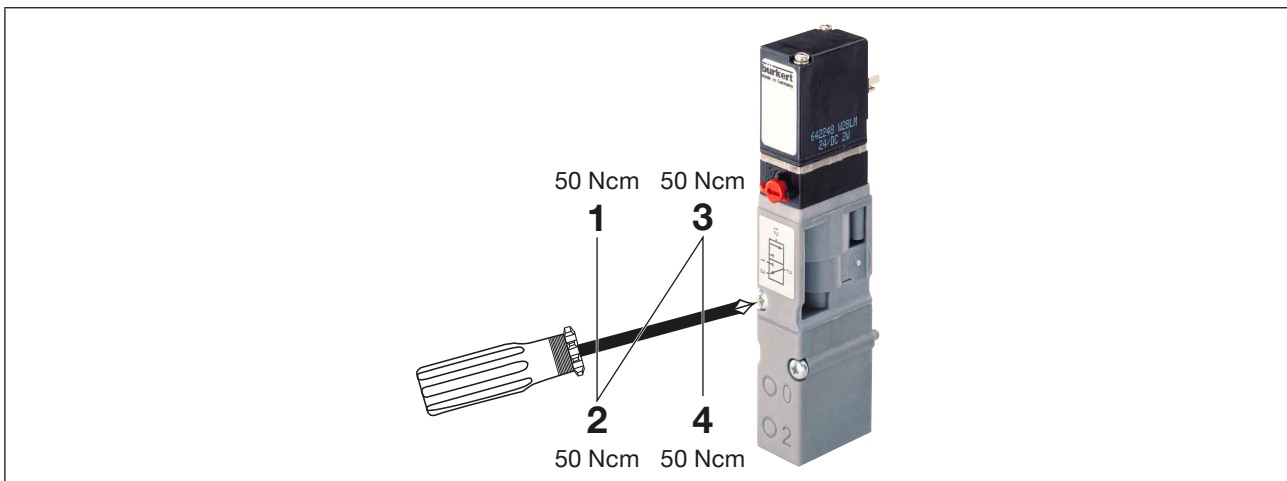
Tightening the screws when replacing valves type 6526 and type 6527
